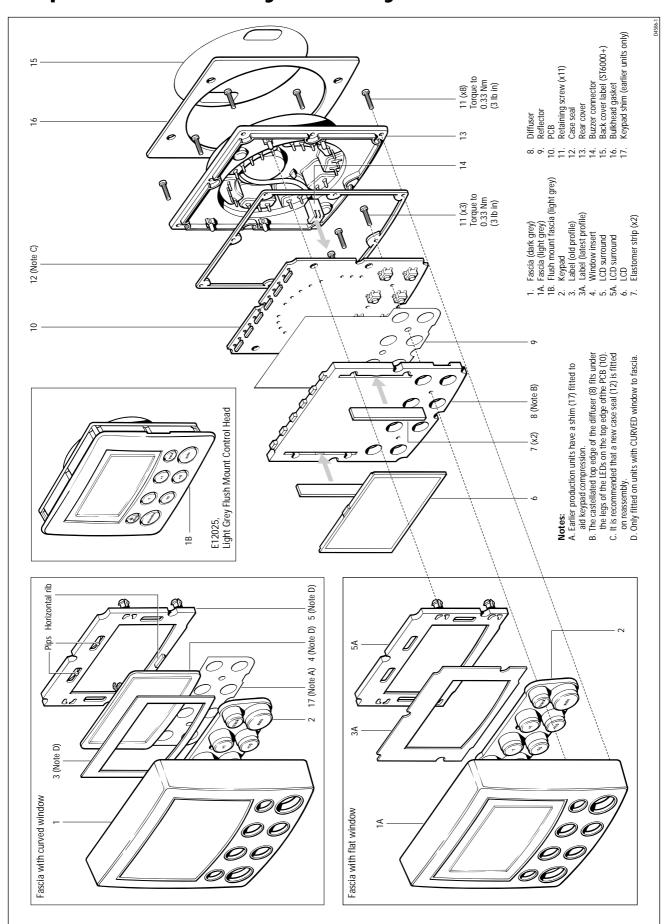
ST6000 Plus Autopilot Control Head exploded view
